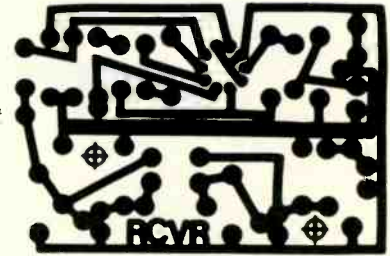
Actual-size etching and drilling guide for receiver at right. Component layout is at left.
